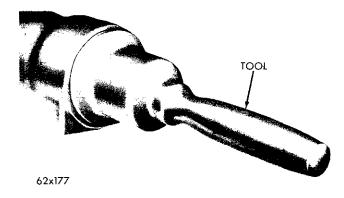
Installing Output Shaft Oil Seal (Chrysler and Imperial Models)
